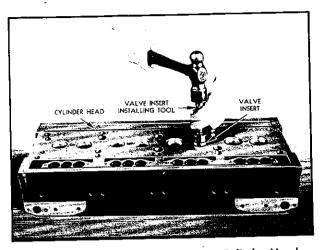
Driving Valve Seat Insert into Cylinder Head.
